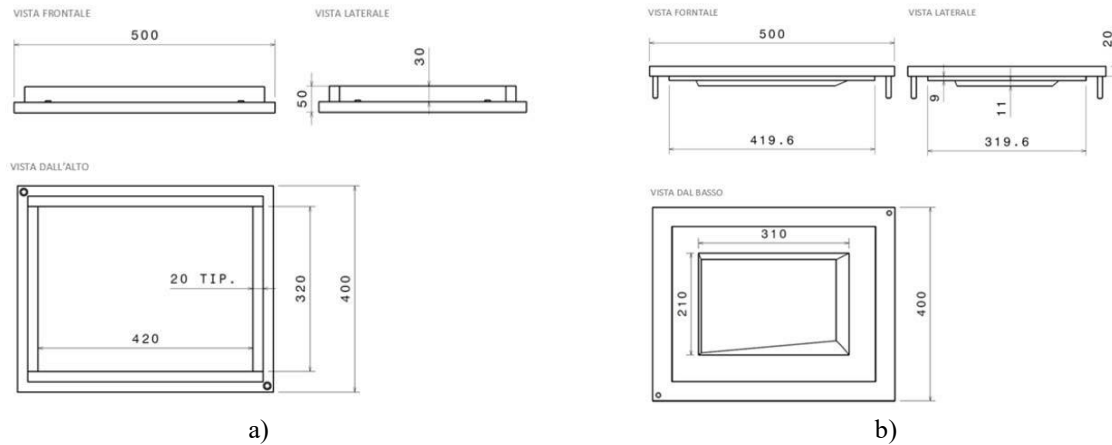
Scheme of the upper half mold (a) and lower half-mold (b) for the case study considered (dimensions in mm).
